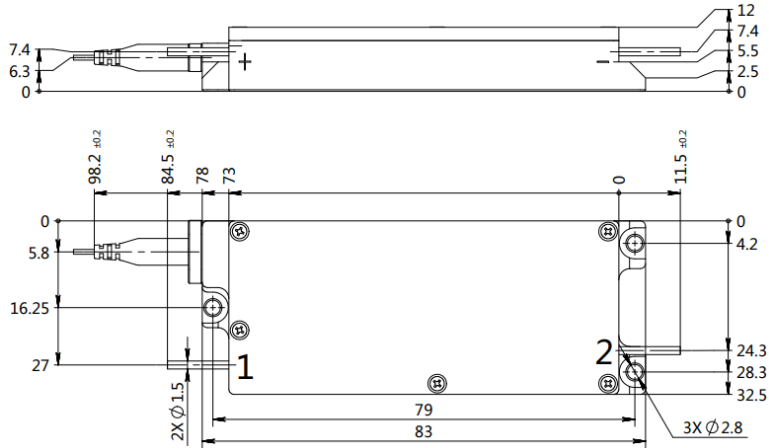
Dimension drawing of the module; the module's dimensions are 83mm*32.5mm*12mm, and the volume is 32370mm³.
